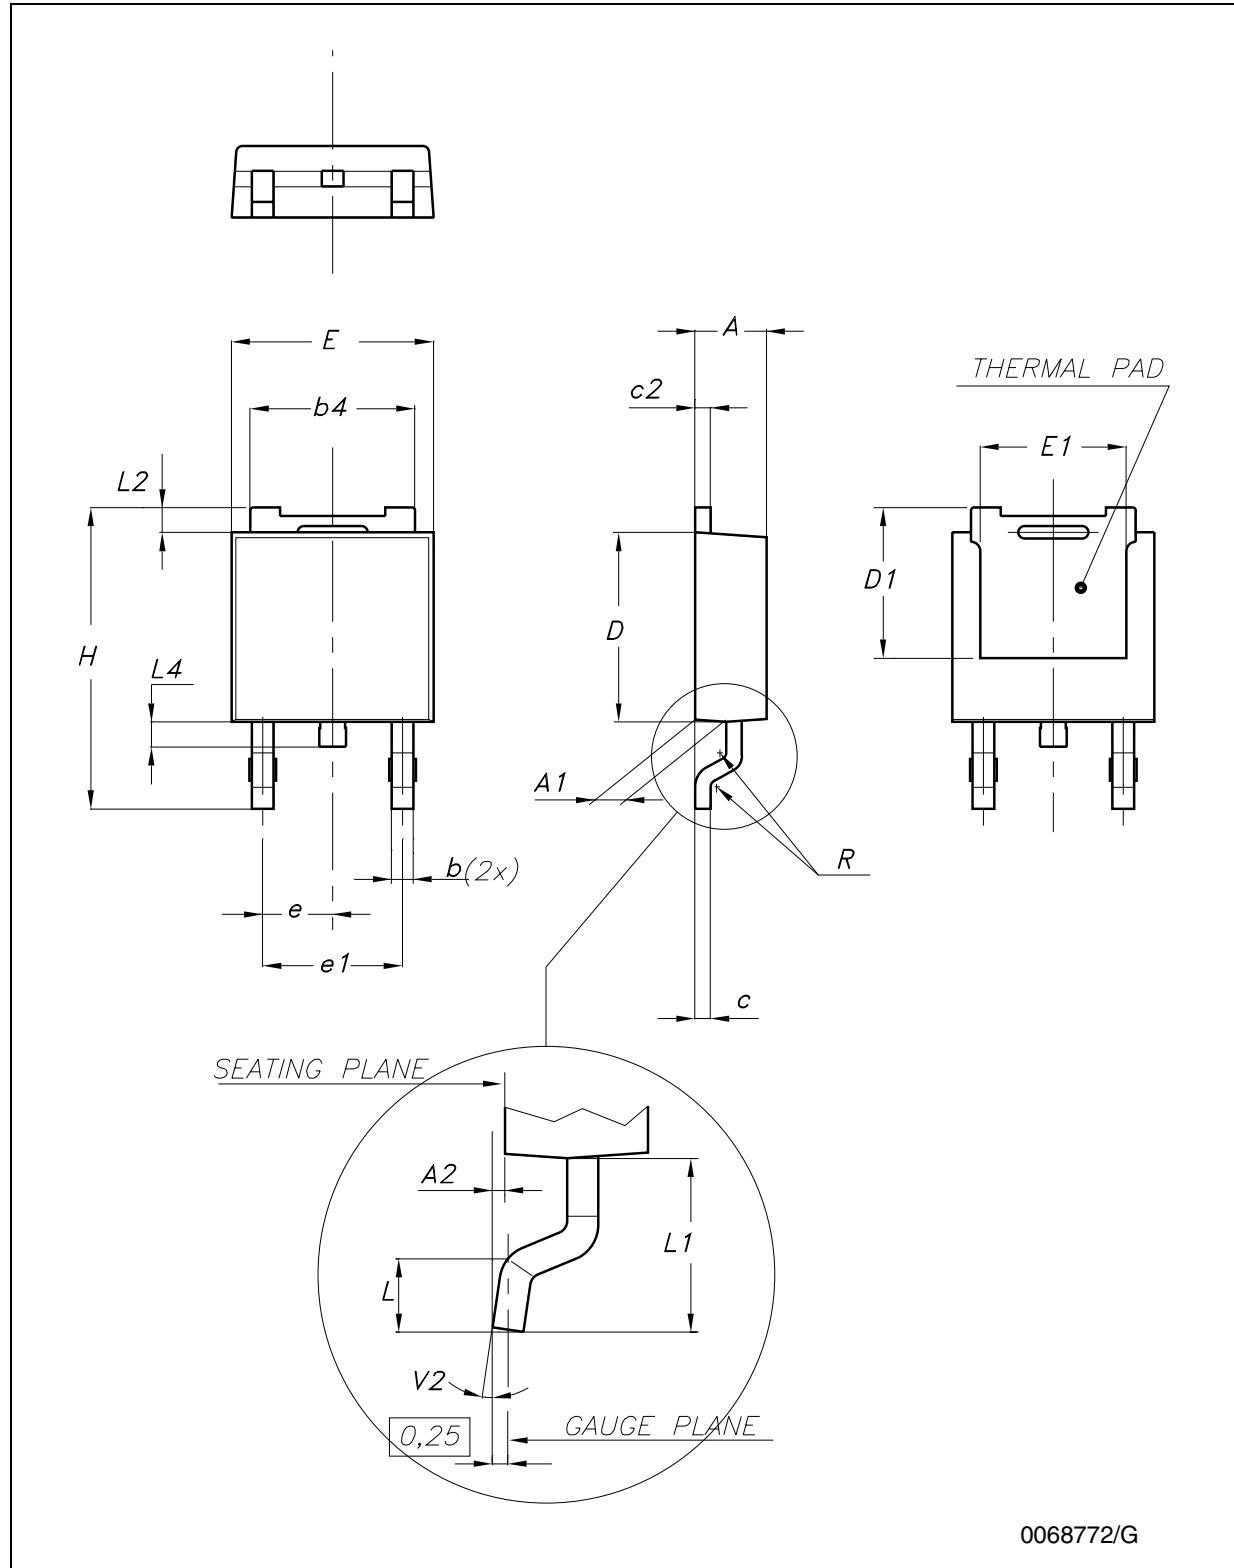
Drawing dimension DPAK (type STD-ST)
